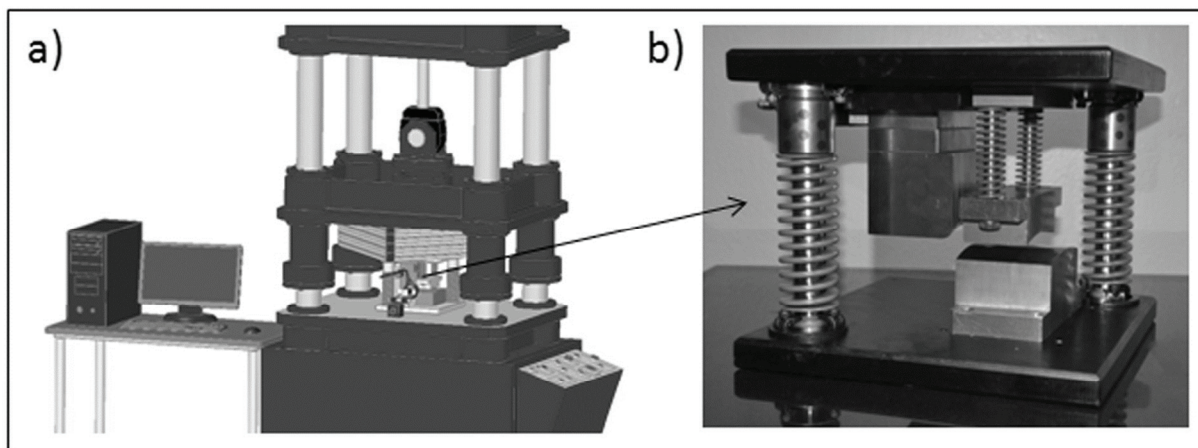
Experimental apparatus for hemming process: a) schematic of the designer apparatus, b) hemming tool.
